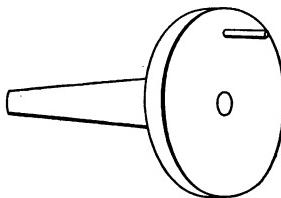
A drill pad for use in the tail stock of a bench lathe
